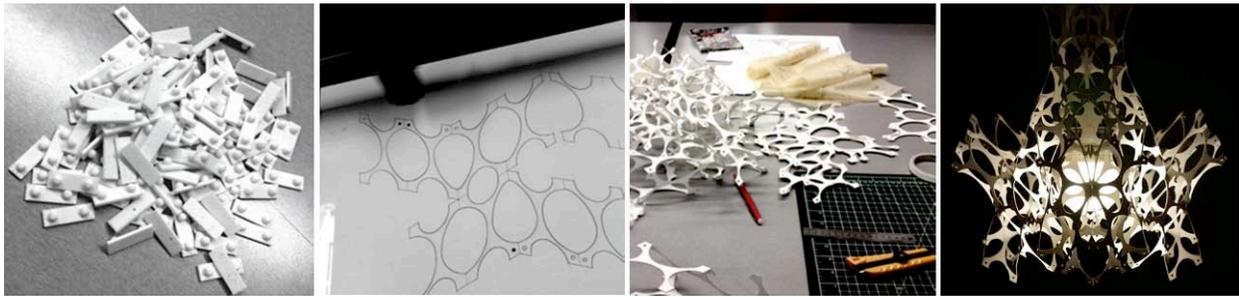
(Left to Right) 3D prints of connection pieces, laser cutting of frames, assemblage of elements, and final light
